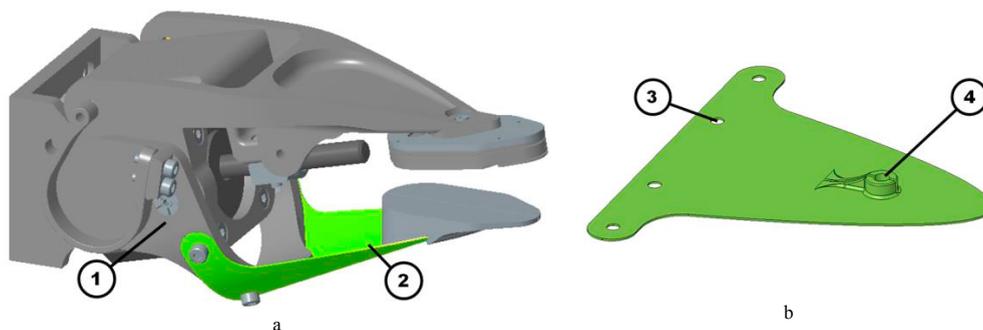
(a) The CAD model of the gripper: (1) main frame; (2) lower finger; (b) In flat shape manufactured lower finger: (3) fixing holes, (4) expandable pin to fix the fingertip
